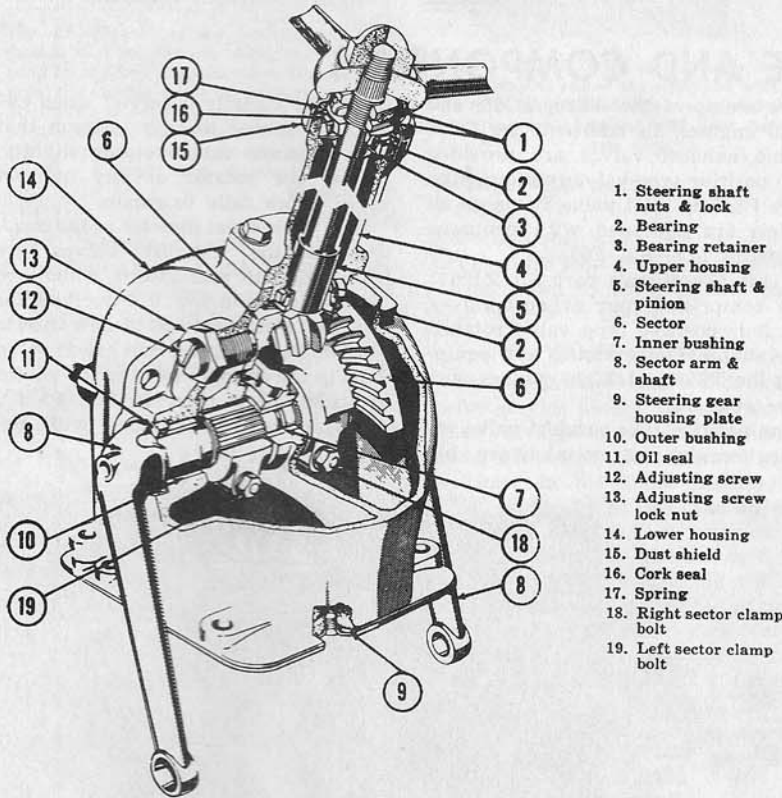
Models TO20 and TO30 steering gear assembly. TE20 is similar.
